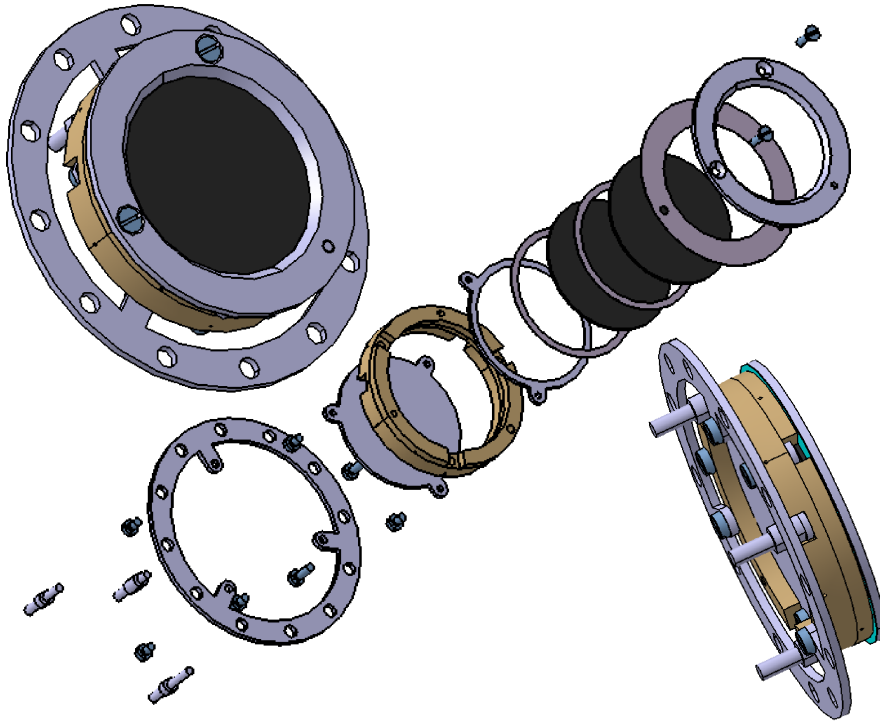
CAD model of the CF 63 compatible MCP assembly. The explosion view shows from left to right, the electrical connectors, mounting screws, mounting pad, anode screws, anode, insulating peek cylinder, backplate holder, nickel contact ring, back plate, nickel contact ring, front plate, nickel contact ring, front plate holder and insulator cover, and the front plate cover mounting screws.
